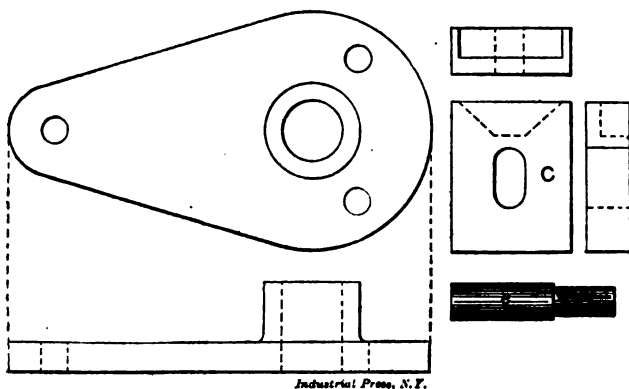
Piece to be Drilled in Jig, Fig. 49, and Detail of Clamp and Feet
